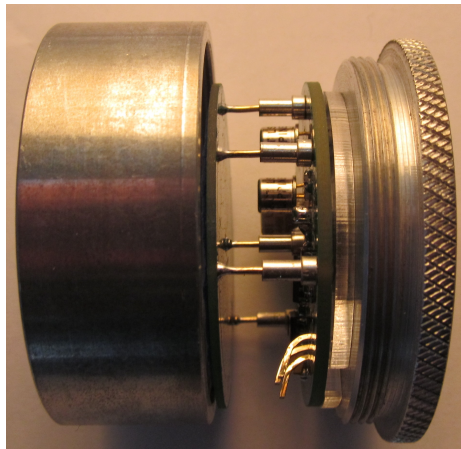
Non-Contact Bio-Potential Sensor - Assembly of Sensor
